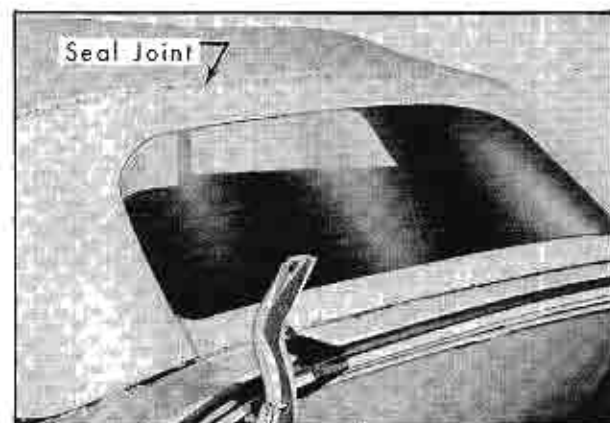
Sealing Top Material to Rear Bow Joint
